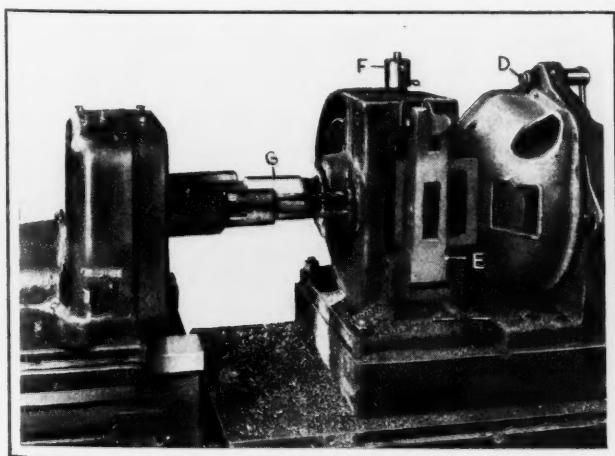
Close-up View of the Jig and Left-hand Tool-head on a Duplex Type of Machine used for boring and drilling the Transmission Case from Both Ends
